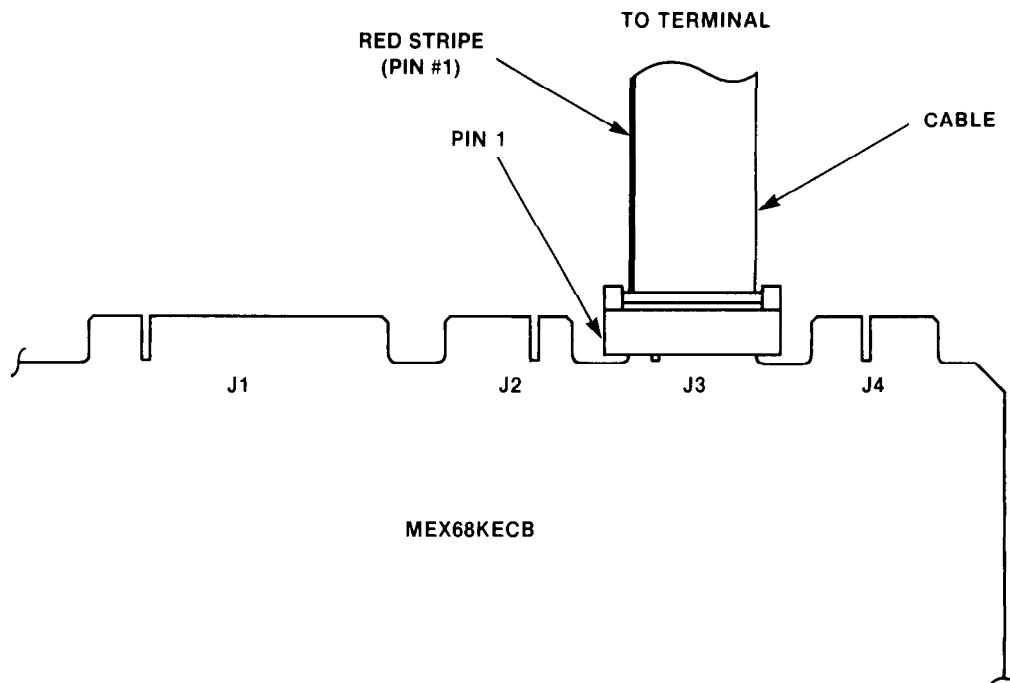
Terminal Cable Connection to MEX68KECB
